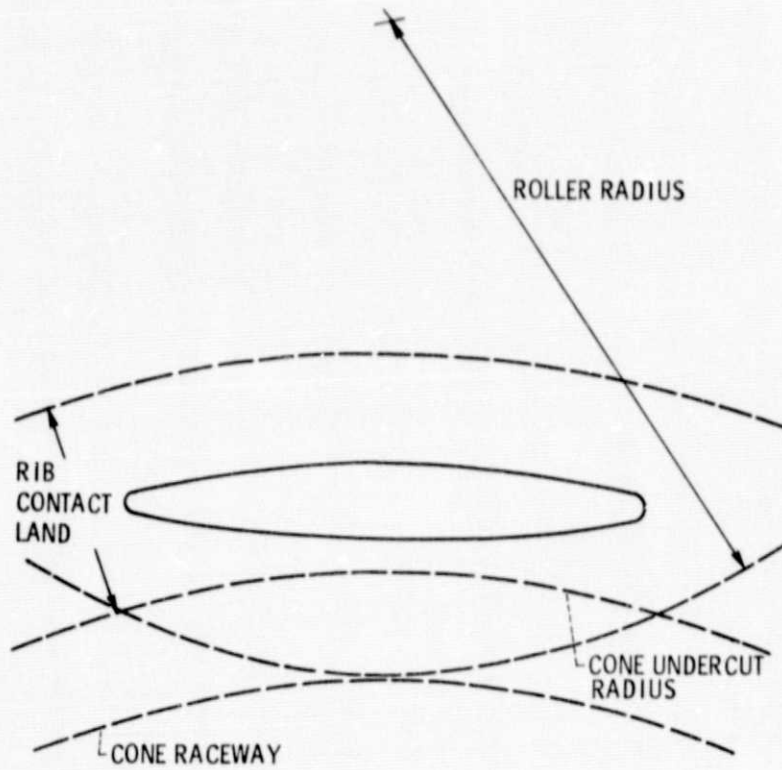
Projected roller-rib contact in a tapered roller bearing. (After Wren (22).)
